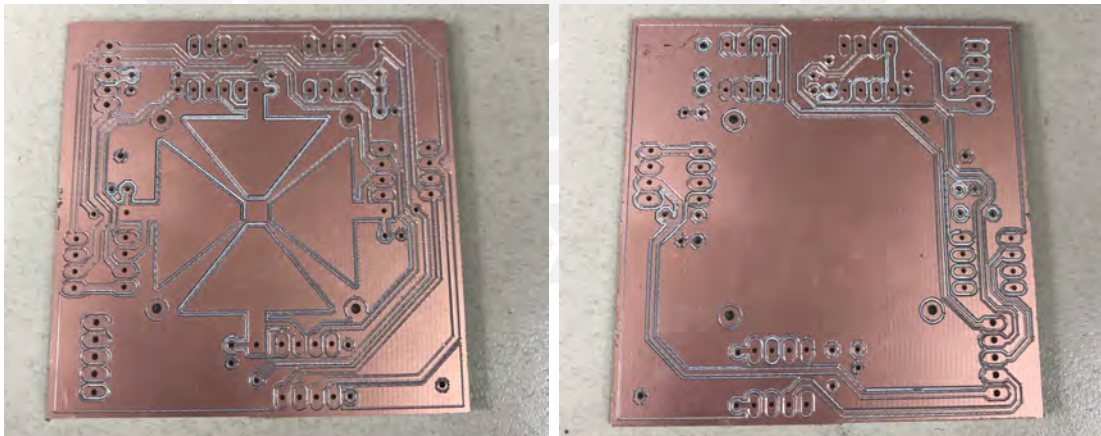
The raw board top and bottom view; dimensions 62 mm x 62 mm
